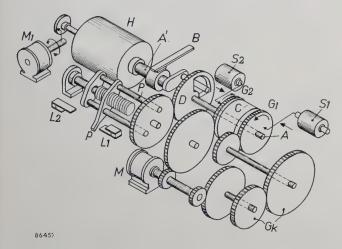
Simplified drawing of the mechanical assembly. The electric motor M runs continuously, driving the gears G_1 and G_2 , idling on shaft A in opposite directions. Shaft A carrying the double-face clutch drum C can be coupled either to G_1 or G_2 by the action of solenoids S_1 and S_2 . H is the helical slidewire resistor ("Helipot"), whose shaft A' is driven by A via an angular pre-travel device D; B friction brake, M_1 motor for the retractable contact mechanism (see fig. 5). P positioning device with limit switches L_1 , L_2 actuated by arm p. G_k exchangeable range gears controlling the speed of movement of the sliding contact of H during the counting interval.
